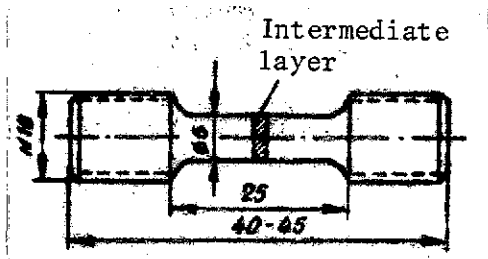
Shape and dimensions of samples for testing mechanical properties.
